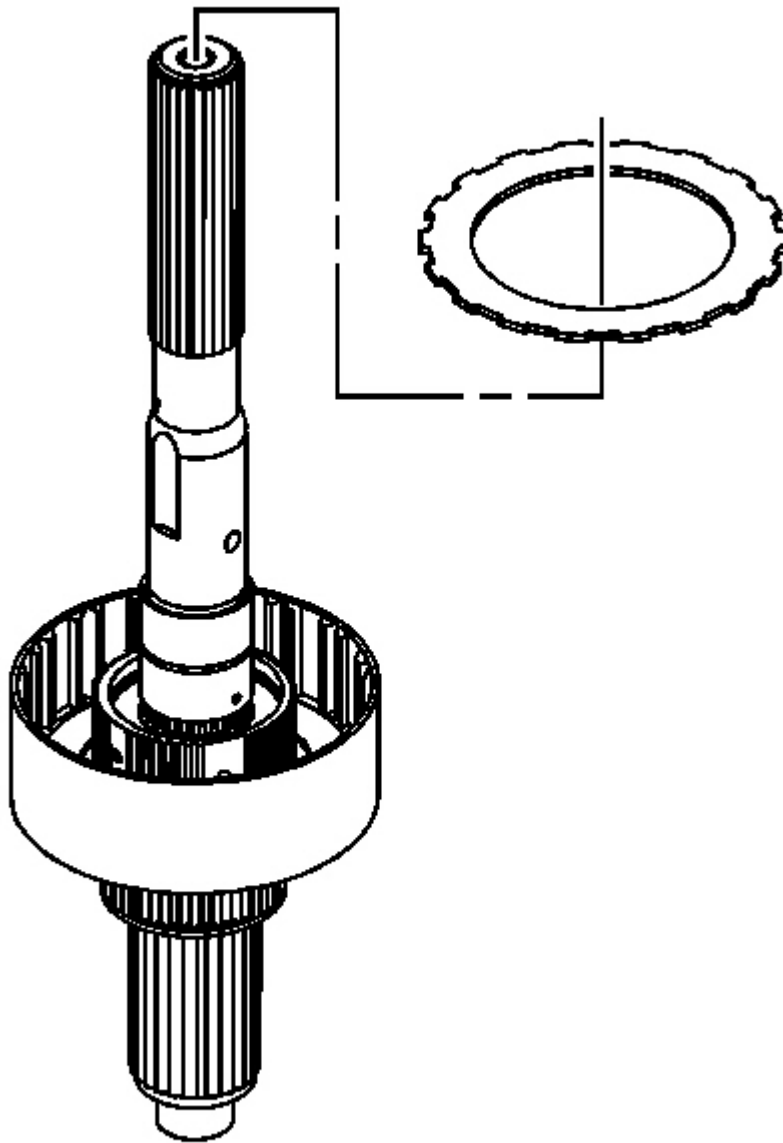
Installing The Clutch Housing Onto The Rear Output Shaft
